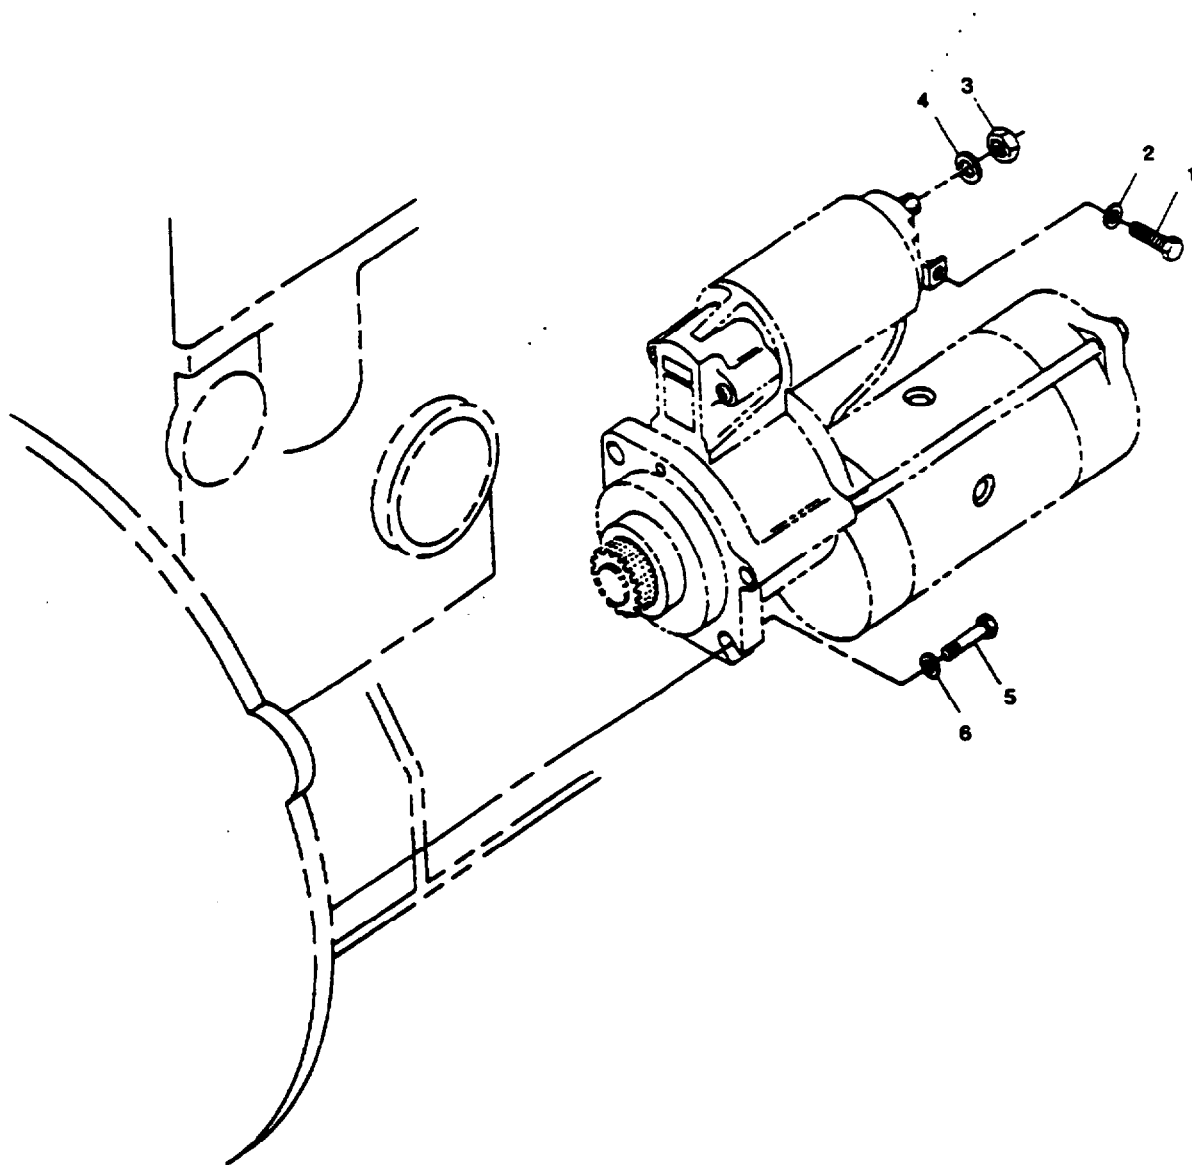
Starter and Solenoid (Sheet 1 of 2)
